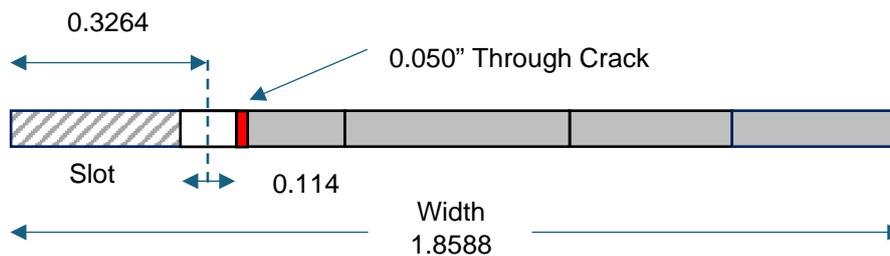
Fatigue Model for Second Crack at Screw Hole at Inner Edge of Bulb
